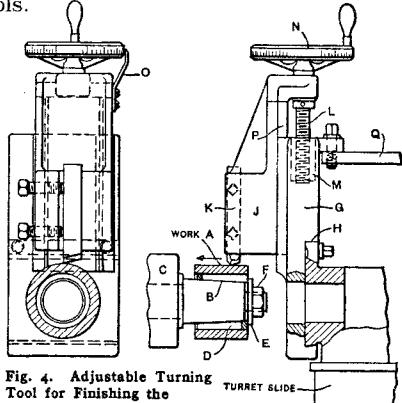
Adjustable Turning Tool for Finishing the Outside of Short Bushings
